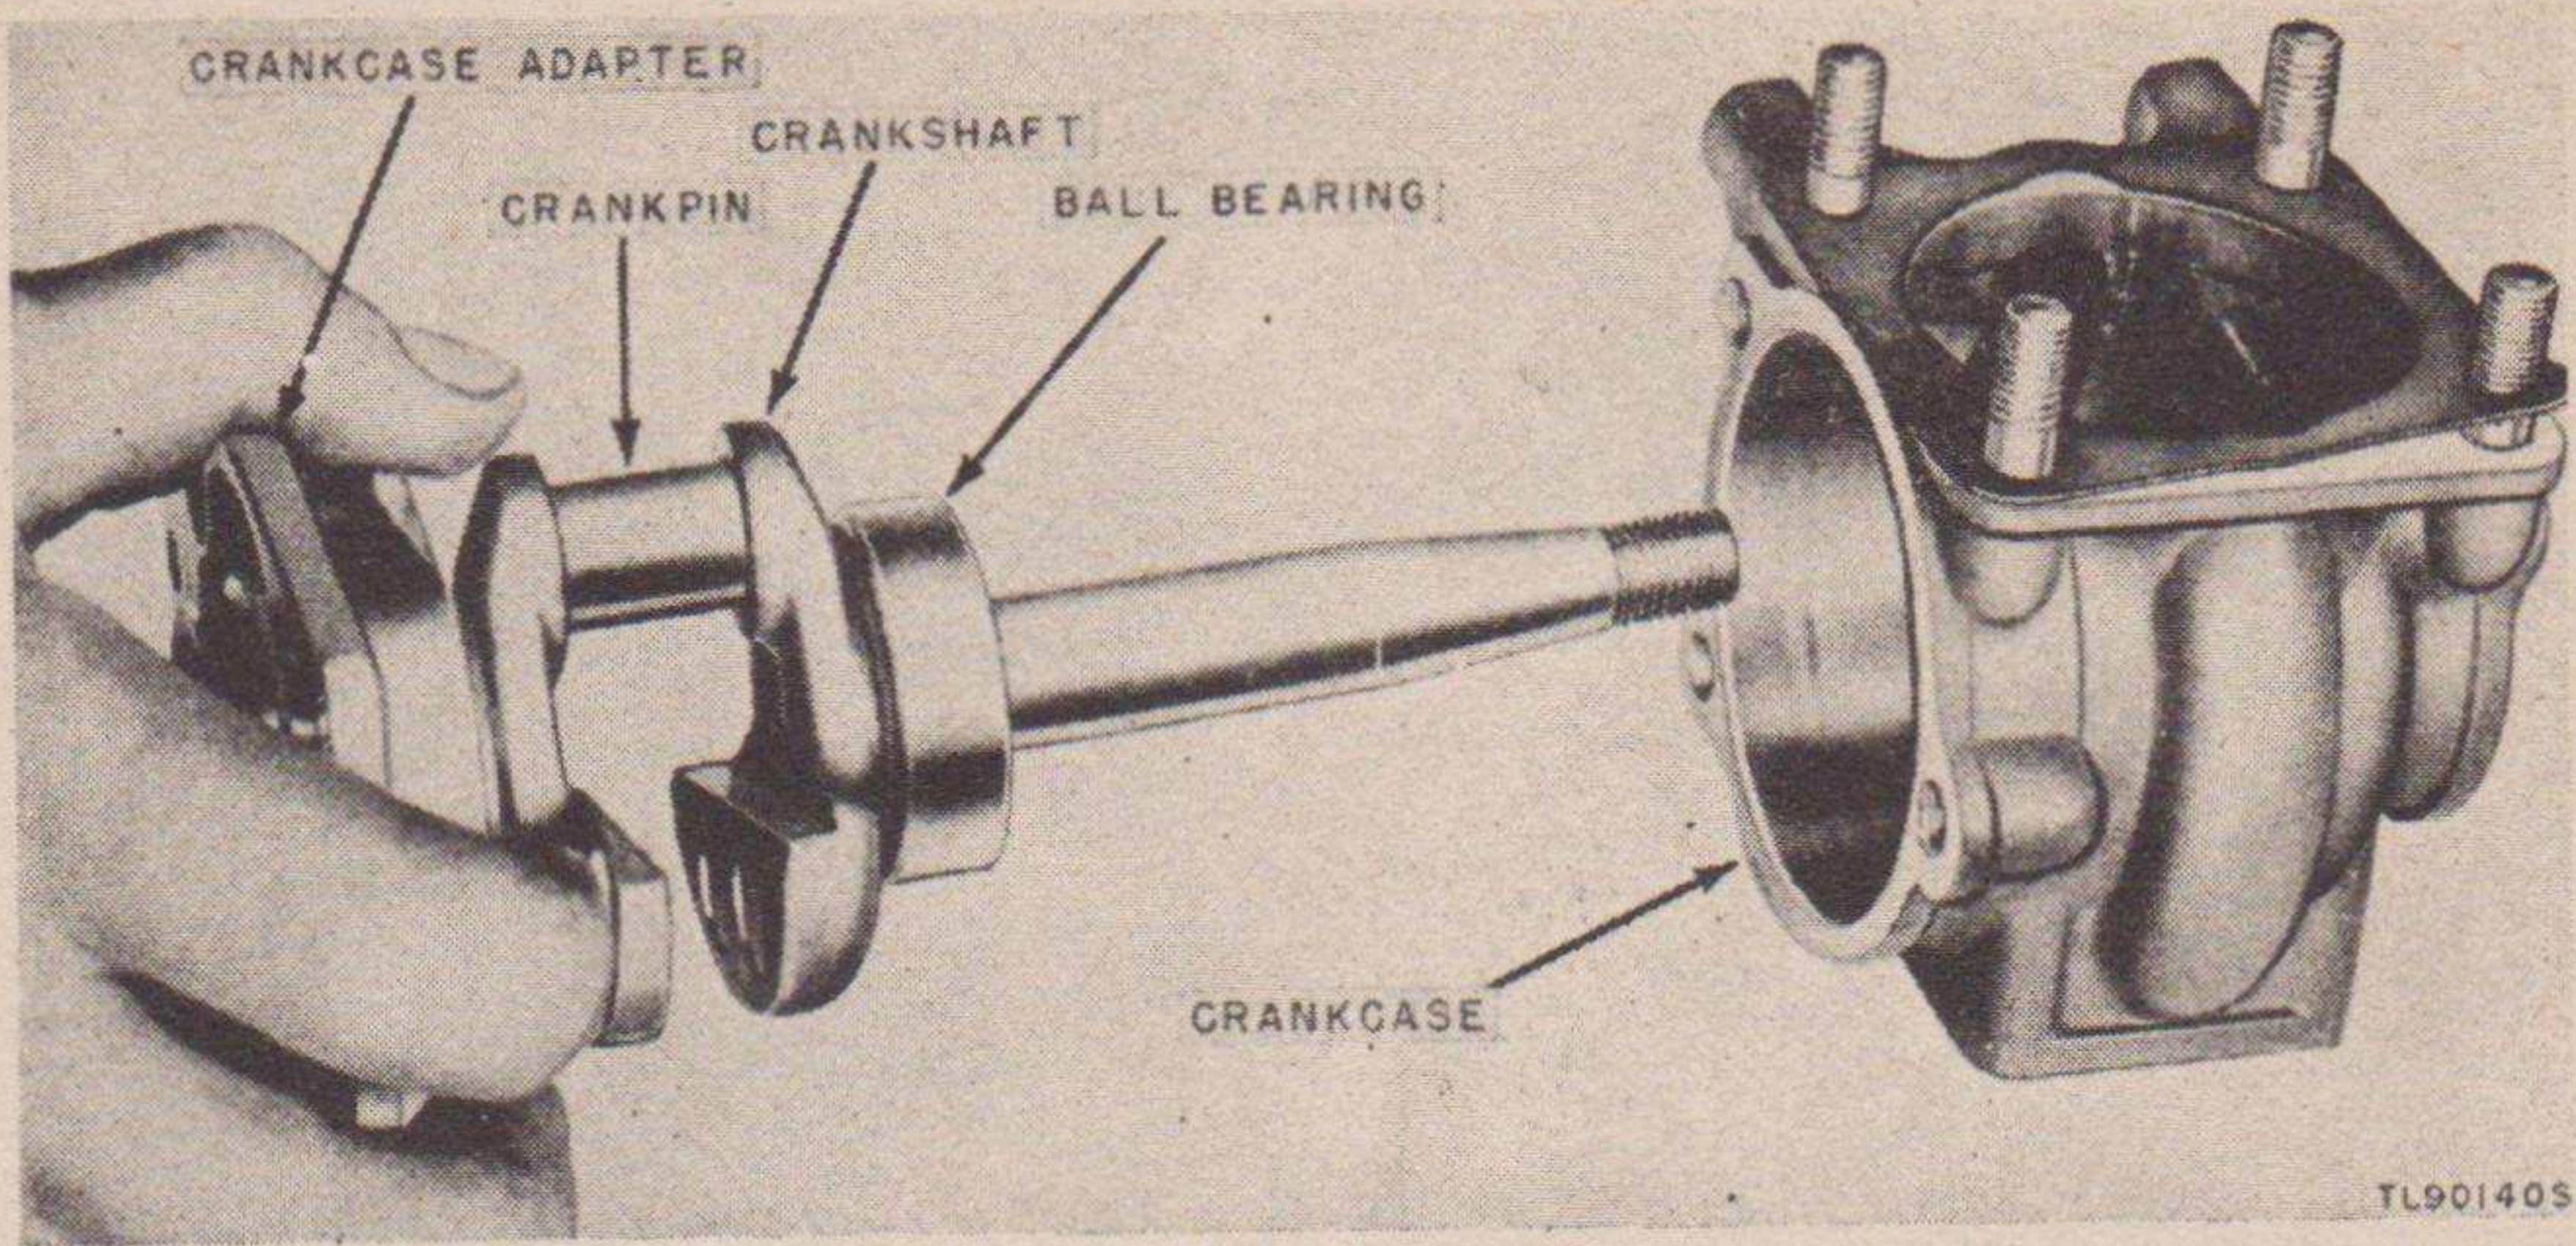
Crankcase bearings and crankcase adapter removed from crankcase
